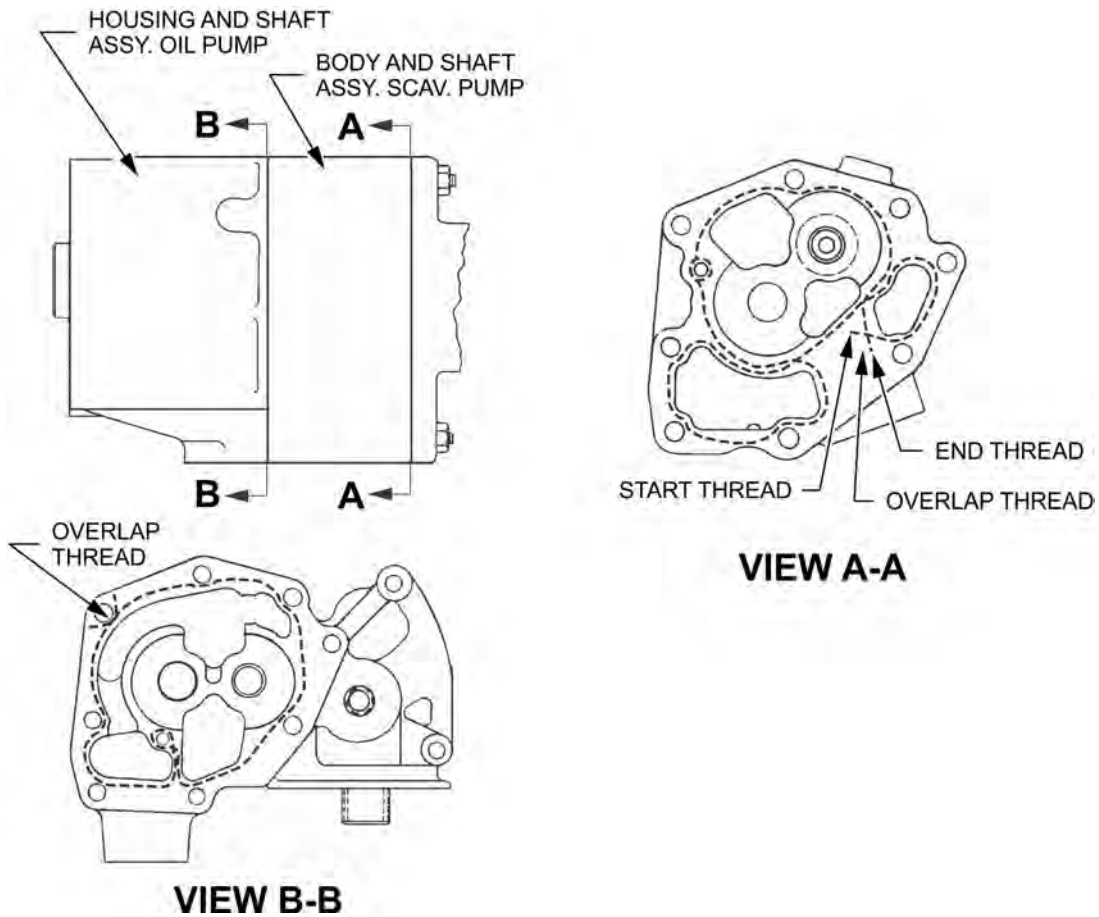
Threading Diagram, Oil Pump Assemblies 646194, 653536, 655121, & 643527
